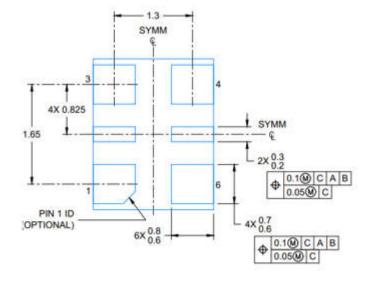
LMK6D/P/H Oscillator in 6-Pin, 2.5mm × 2.0mm DLF Package
